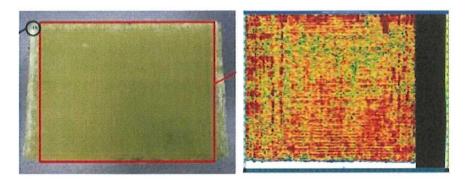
Unidirectional polyurethane laminate 32 is inspected on the vacuum bag side. The defects are distributed through the laminate. The upper part shows more defects than the bottom part.
